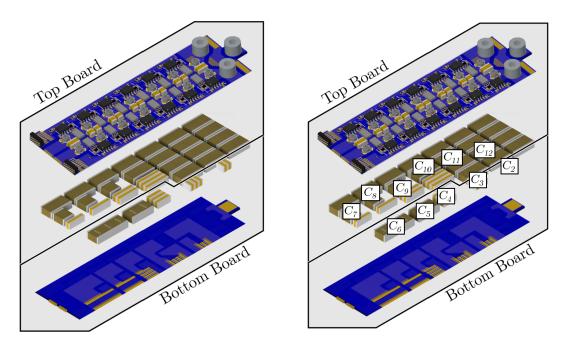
Dual-PCB stacking design. (a) Flying capacitors fit together between the Top Board and Bottom Board, (b) Larger flying capacitors on one PCB are paired with smaller ones on the other so everything fits together neatly.
